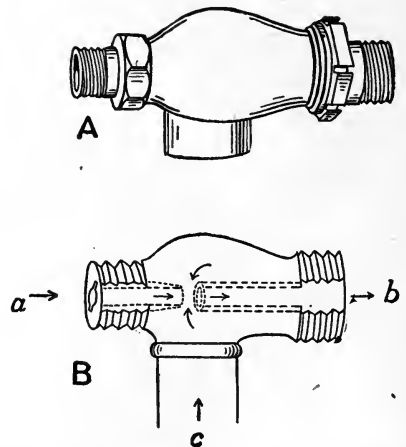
A, STEAM EJECTOR; B, STEAM EJECTOR IN SECTION; a, inlet; b, outlet; c, suction.
